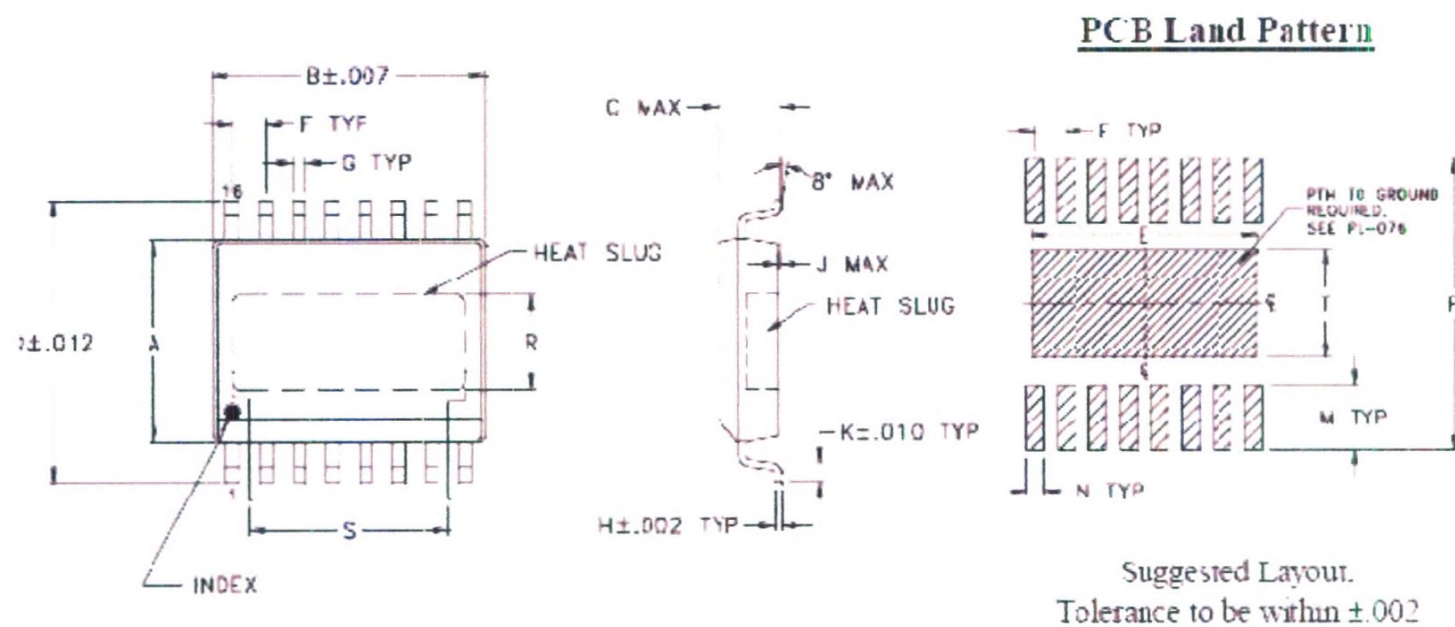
v.A8: Hela10D mounting instructions specified by the manufacturer
